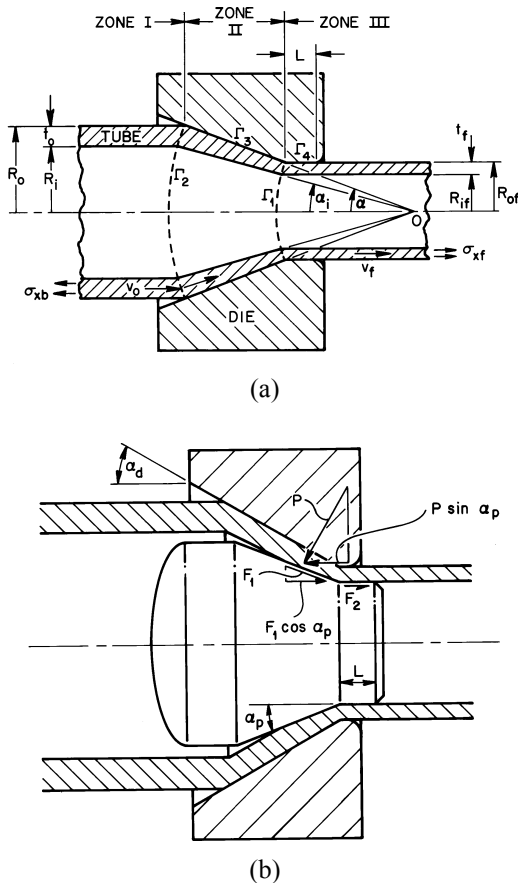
Tube sinking (a) and tube drawing with a floating plug (b).
